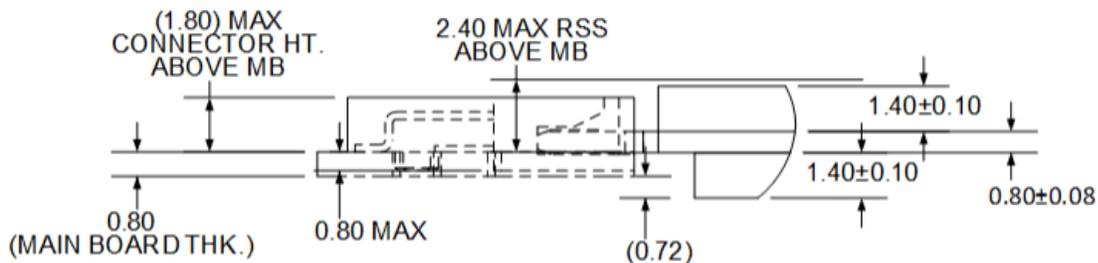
Stack-up Mid-mount (In-line) Double-sided (D5) Add-in Card for 1.5 Maximum Top-side and Bottom-side Component Height
